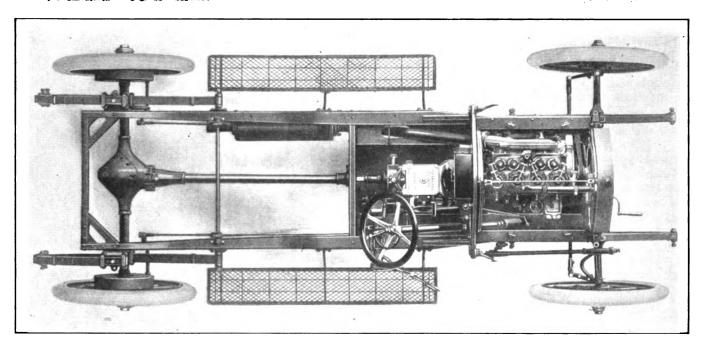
SHOWING A TOP VIEW OF THE CHASSIS OF A CHALMER'S CAR
